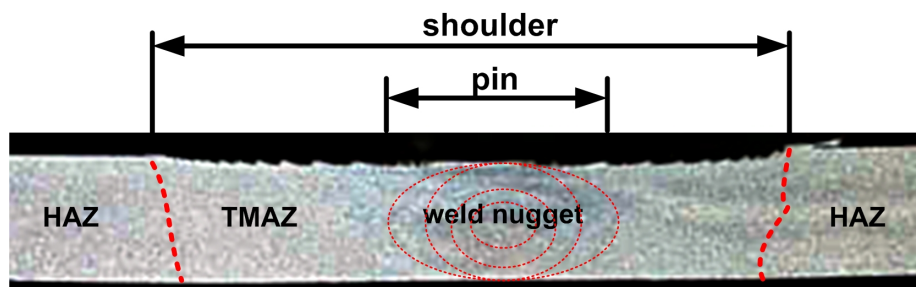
Macrostructure of the FS welded AA6082-T6.
